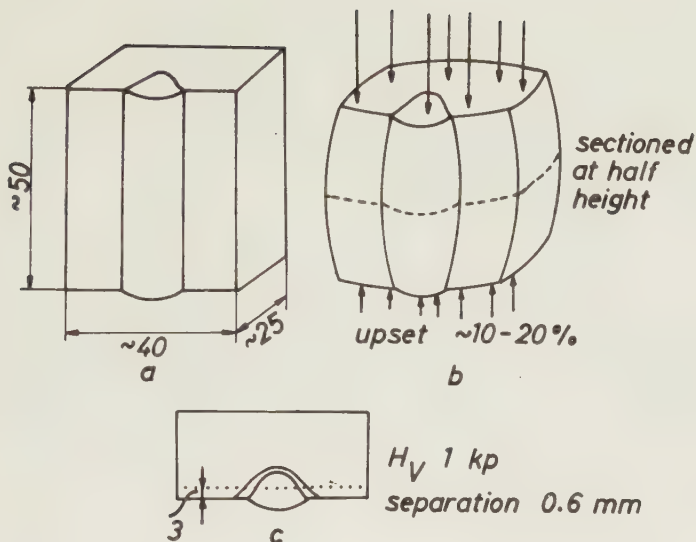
(Fig. 6, paper 2). Schematic diagram of the three steps used during strain age testing. a) sample removal from weldment, b) upsetting (ca 15 %) and sectioning of specimen, c) hardness measurement (H_V 1 kp) along a line below the surface (say 3 mm) across the base metal, heat-affected zone and weld metal.
